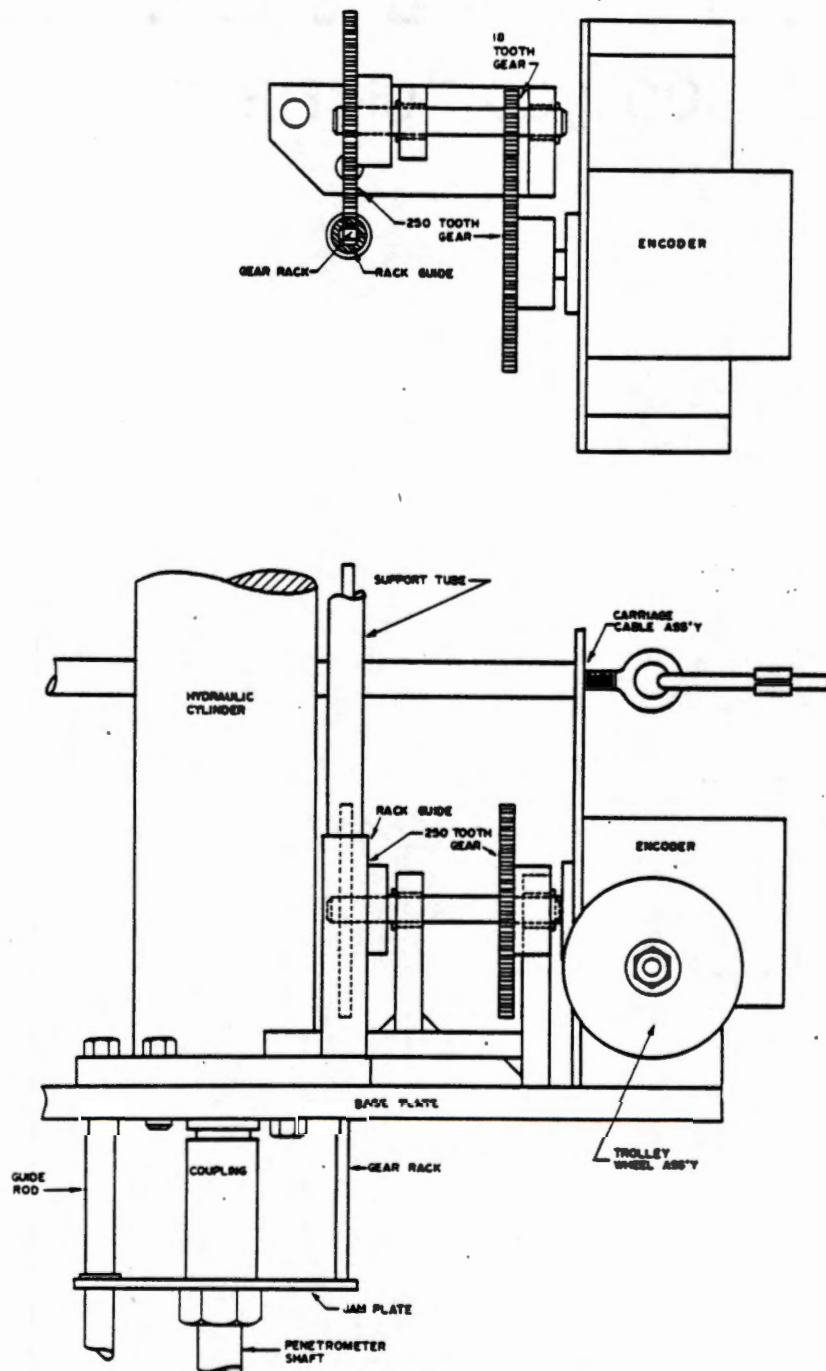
Top and side view of gear-encoder mechanism for depth position measurement. The gear rack, moving with the penetrometer, drives gears to turn the encoder.
